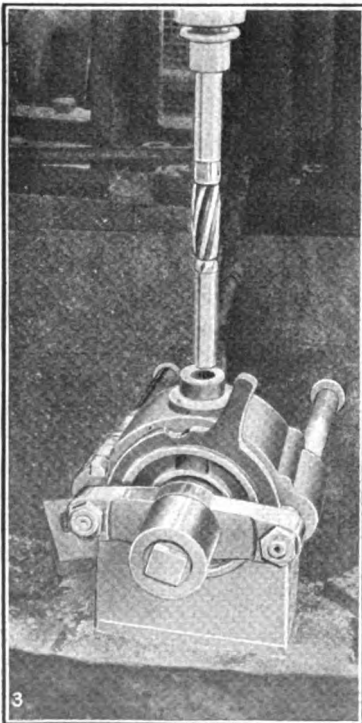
MACHINE REAMING OF PISTON-PIN HOLE. FIG. 4. SCALES AND INSPECTION GAGES
